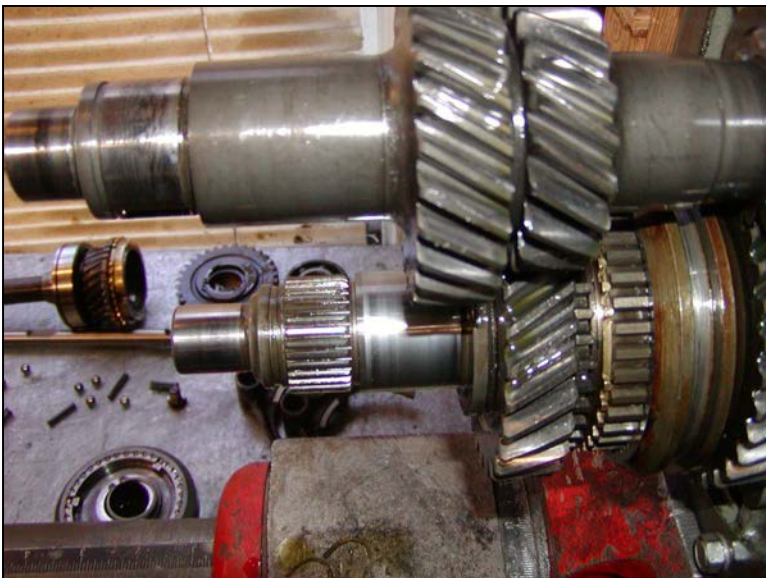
Transmission shafts shown here with counter drive gear and main drive gear removed.
